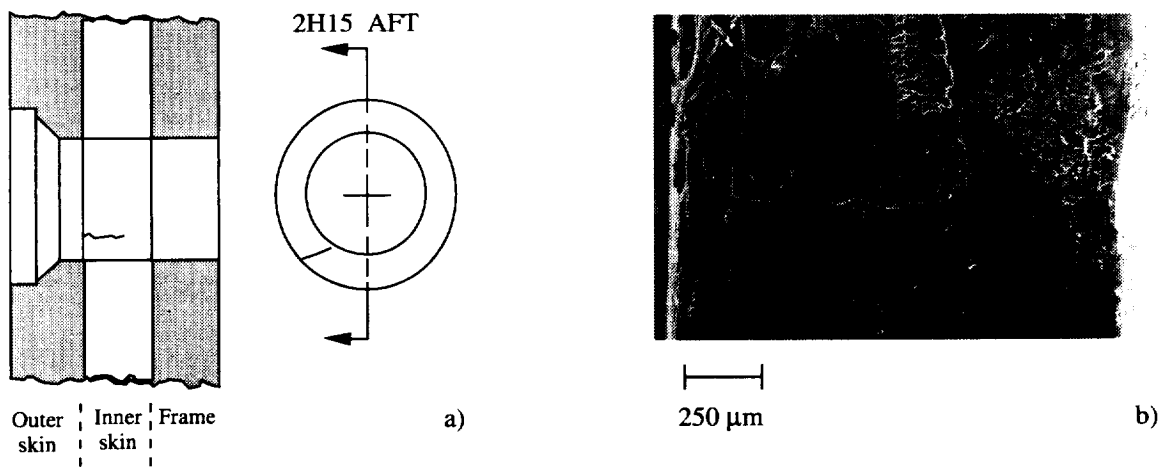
a) The schematic shows the rivet hole 2H15 configuration and the location of the inner skin fatigue crack oriented in the aft direction and below the 8 o'clock position. b) The SEM micrograph shows the inside surface of the rivet hole and a fatigue crack extending from the outboard corner. The crack was partially opened during the destructive examination. SEM examination into the partially opened corner crack verified that the crack was a transgranular fatigue crack.
